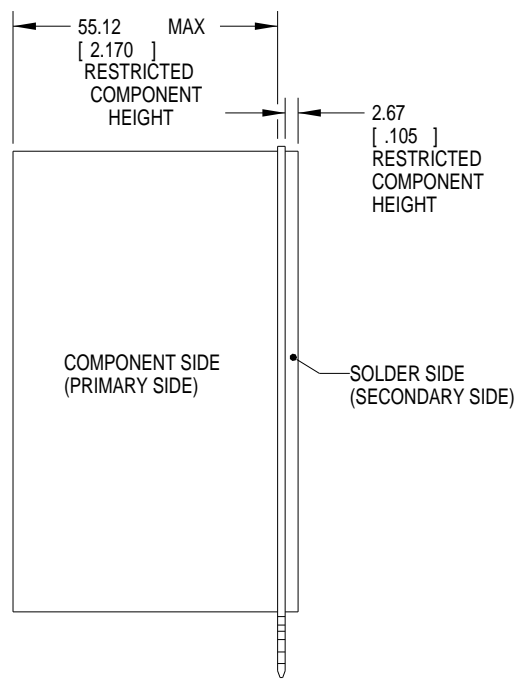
PCI Express DUAL-SLOT Add-in Card Dimensional Drawing
